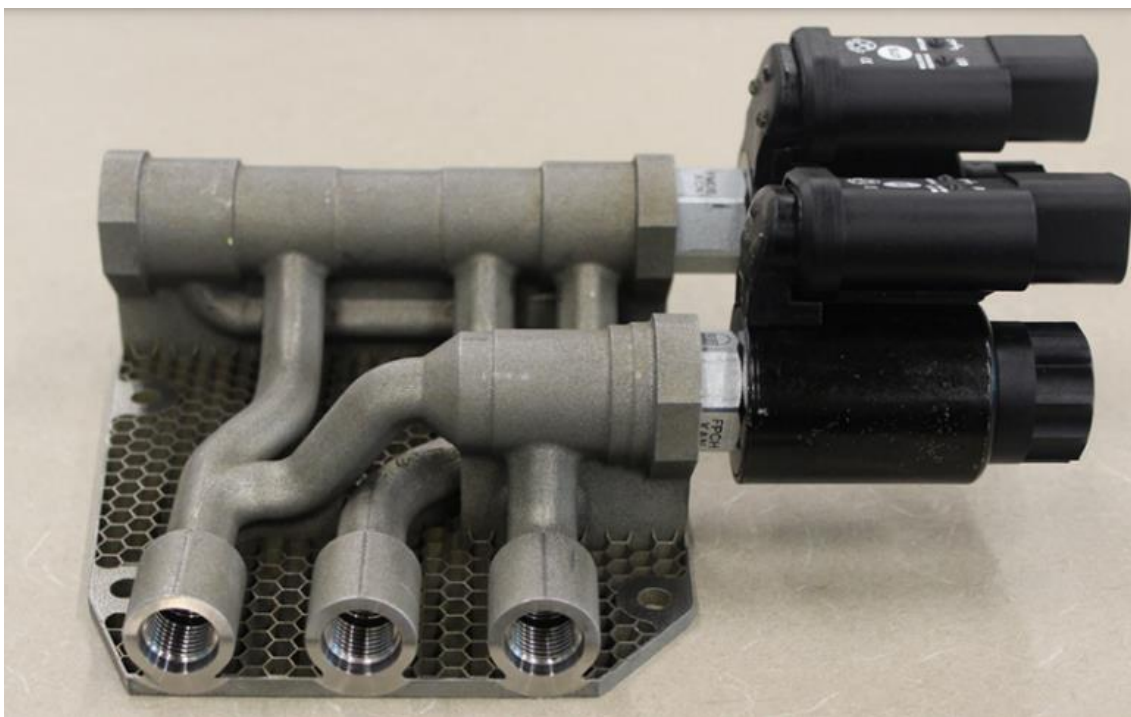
Hydraulic Manifold produced with PBF-LB/M, photo curtesy of CIMP-3D[6]
